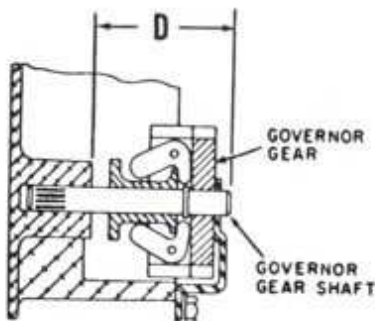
Correct installation of governor shaft and gear and weight assembly on Models HH70, HM70, HM80 and HM100. Dimension (D) is 1-1/4 inches (34.9 mm) on Models HM70, HM80 and HM100 or 1-17/64 inches (32.1 mm) on Models HH70.
